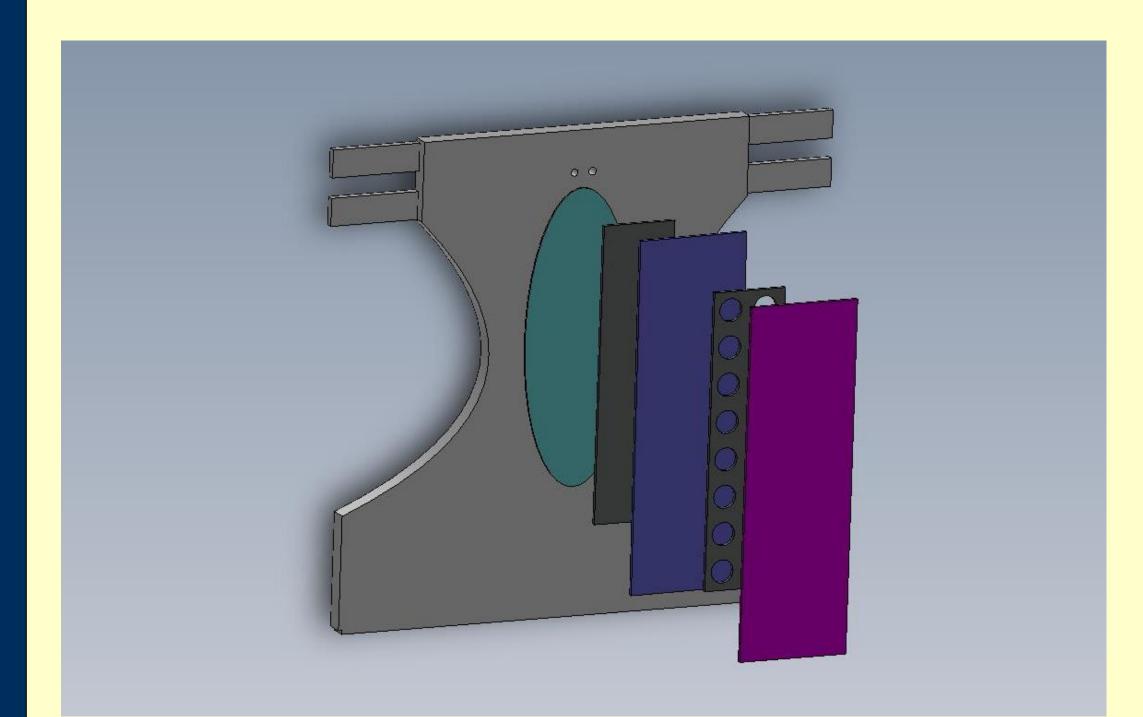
Exploded SolidWorks depiction of the various layers that compose the prototype
